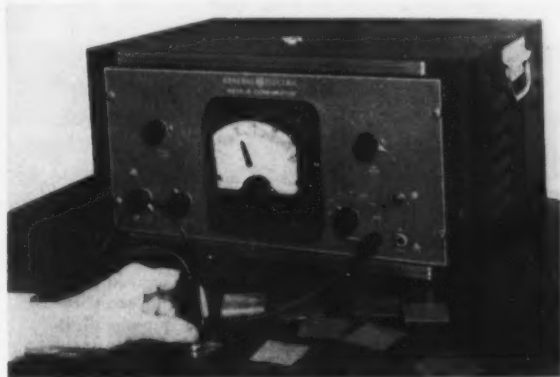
The new test head in use with the electronic unit. Correct application of the head to the part being inspected is shown.
